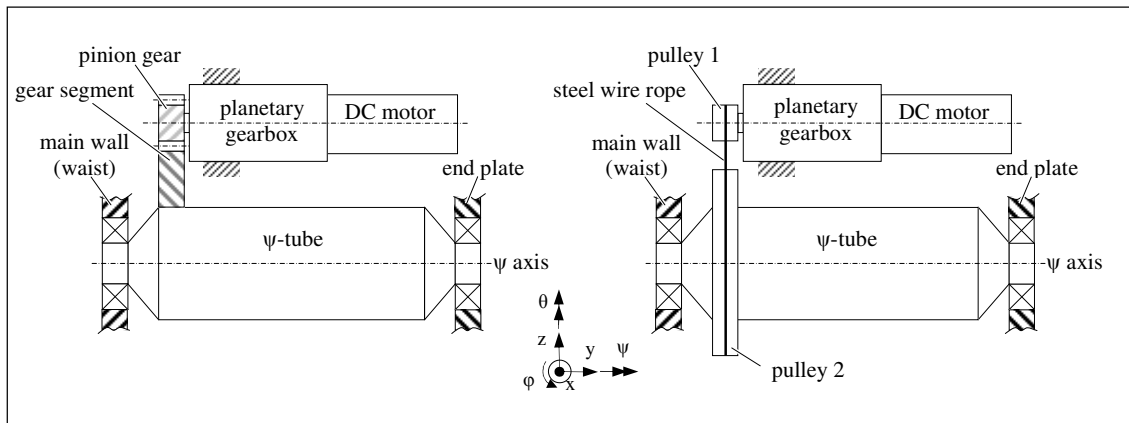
Actuation of hip  $\psi$ , with a DC motor and planetary gearbox. As secondary transmission a gear set (left) or e.g. steel wire rope (right) can be used.
